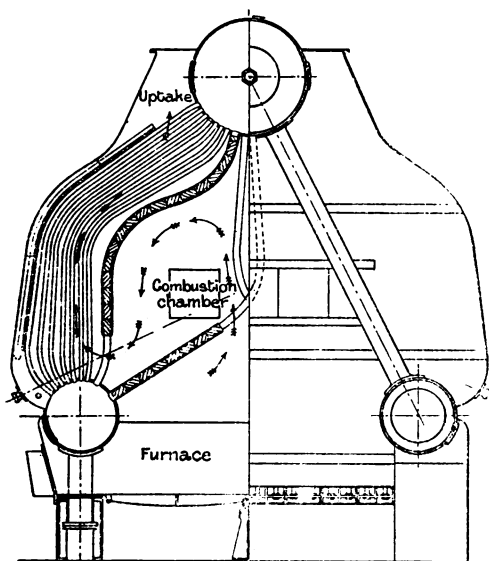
Weir Water-tube Boiler, with refractory furnace and combustion chamber.
